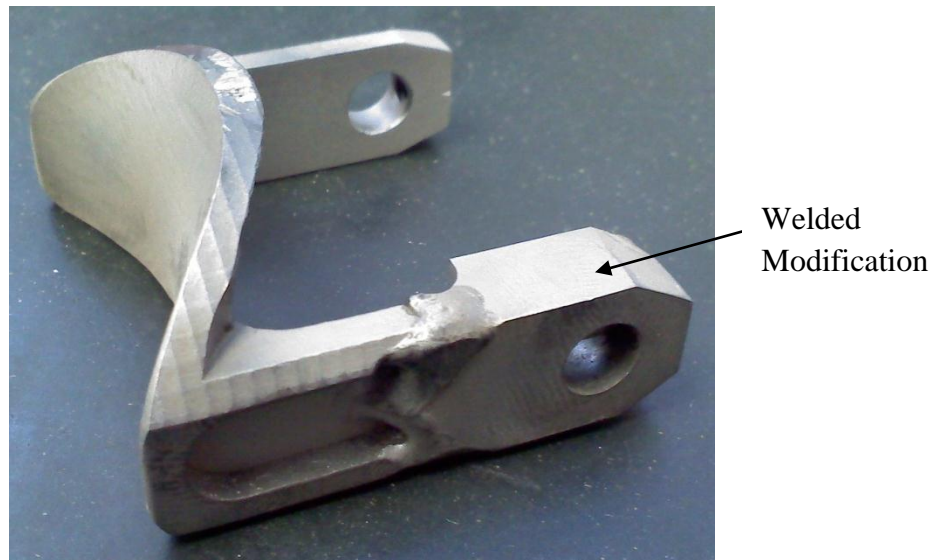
SCT Exhaust Valve – Modification to Valve Leg for Tapered Pin.
